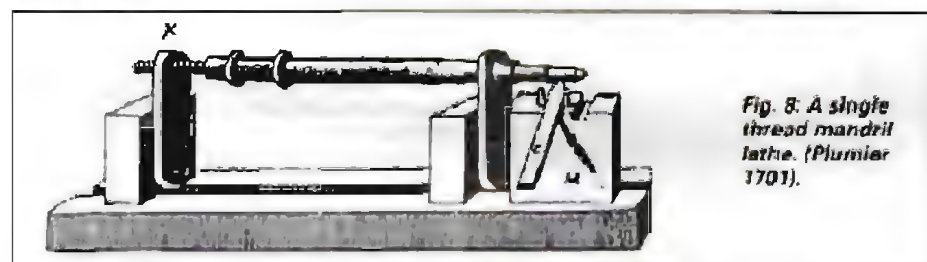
A single thread mandril lathe. (Plumier 1701).
